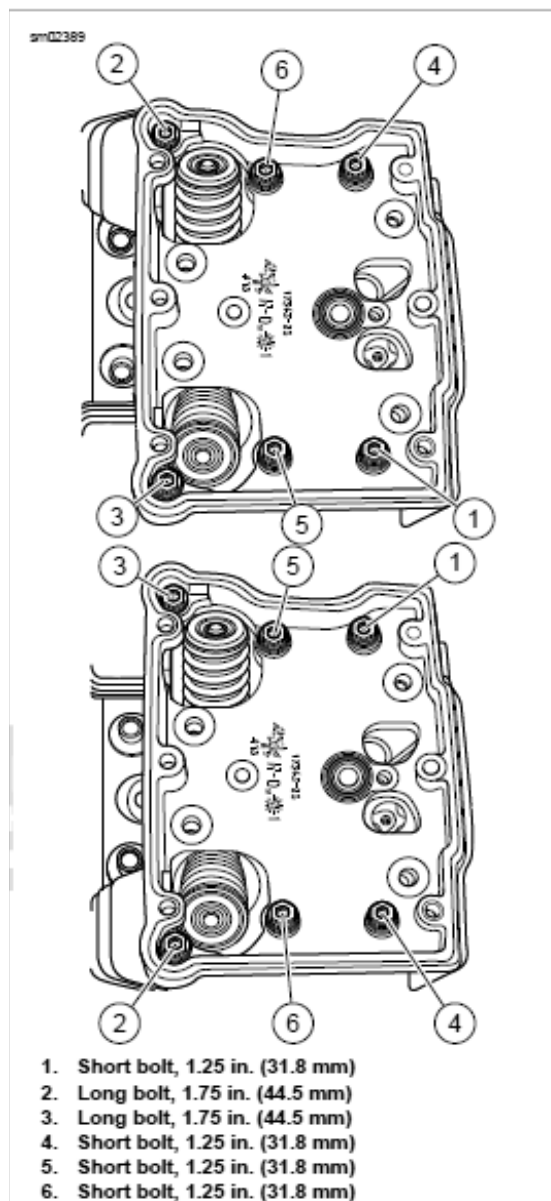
Rocker Housing Torque Sequence and Bolt Size
